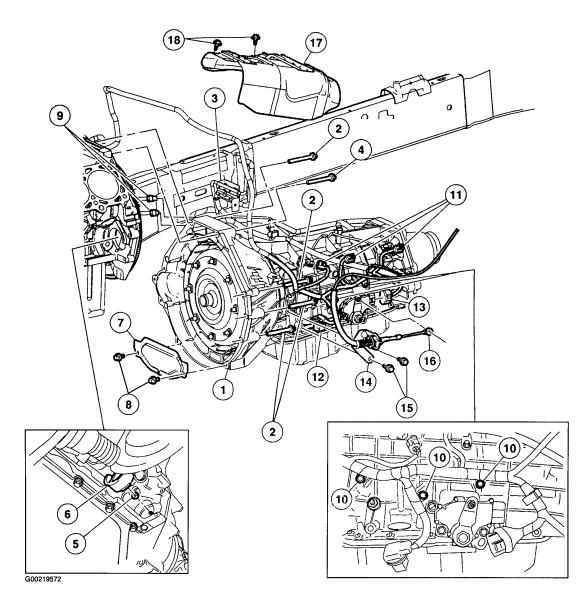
Identifying Component Installation Order (1 Of 3) Courtesy of FORD MOTOR CO.
